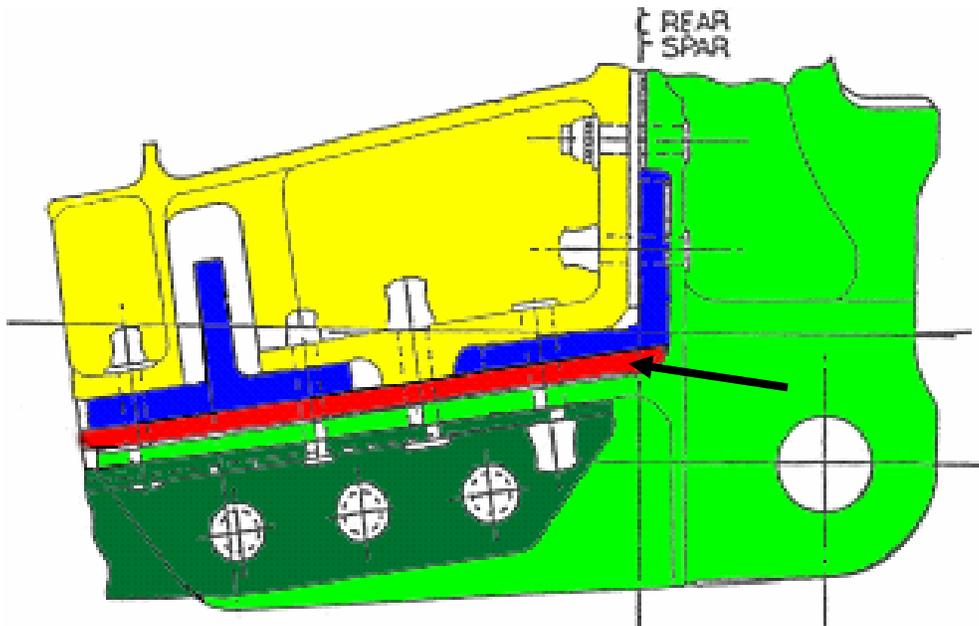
Representative multi-layer aircraft structure requiring detection of fatigue cracks in the layer indicated by the arrow.
